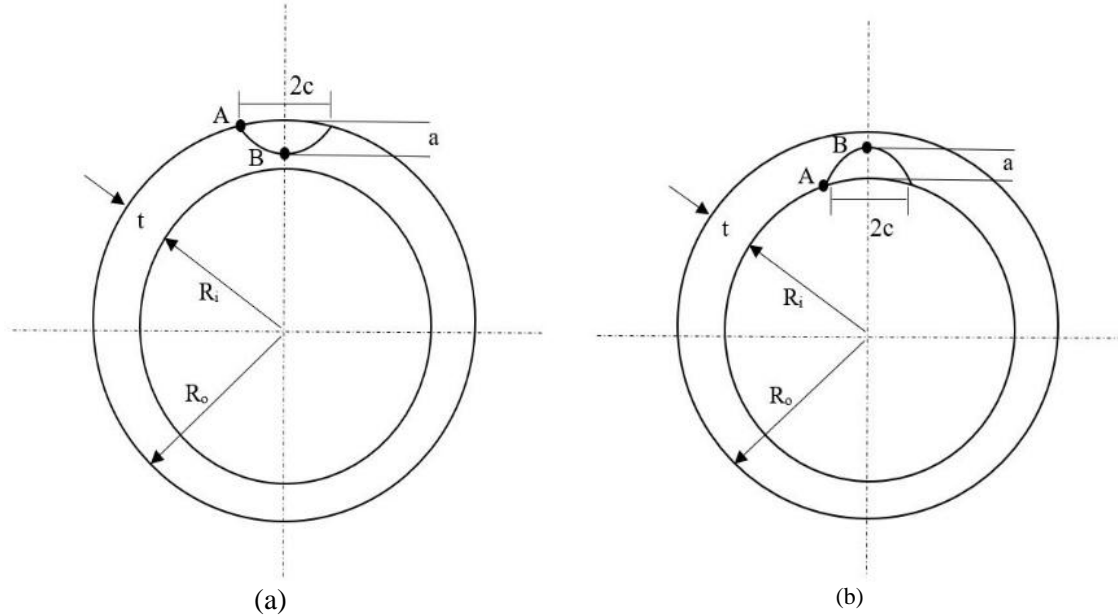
Cross-section of a cylinder with (a) external, and (b) internal circumferential semi-elliptical cracks
